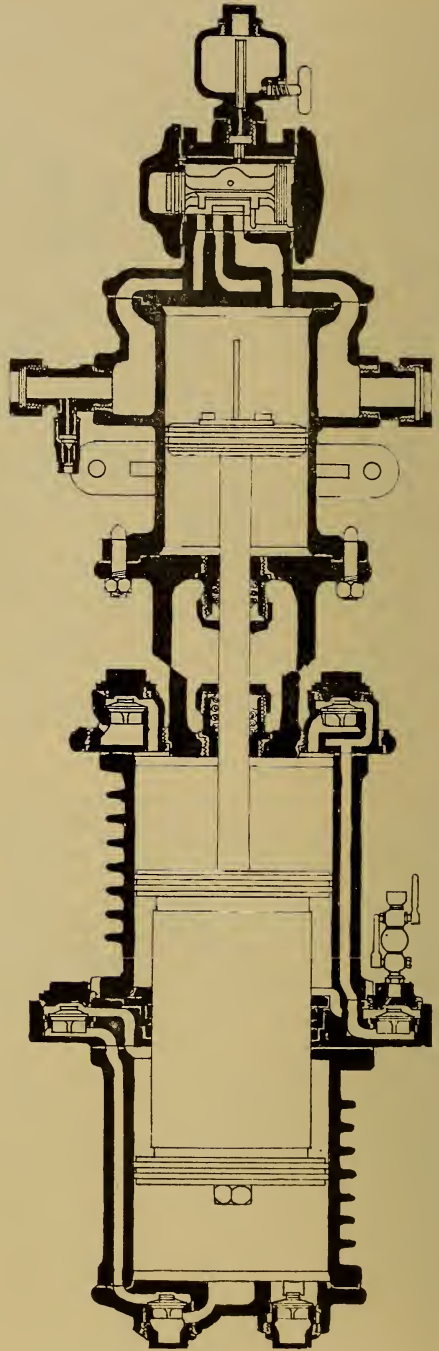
SECTIONAL VIEW OF WESTINGHOUSE DIRECT-ACTING TWO-STAGE AIR COMPRESSOR. WESTINGHOUSE BRAKE COMPANY, PITTSBURG, LONDON, ETC.
